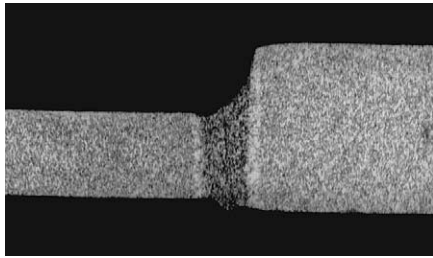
Metallographic image of a laser weld without material addition.
